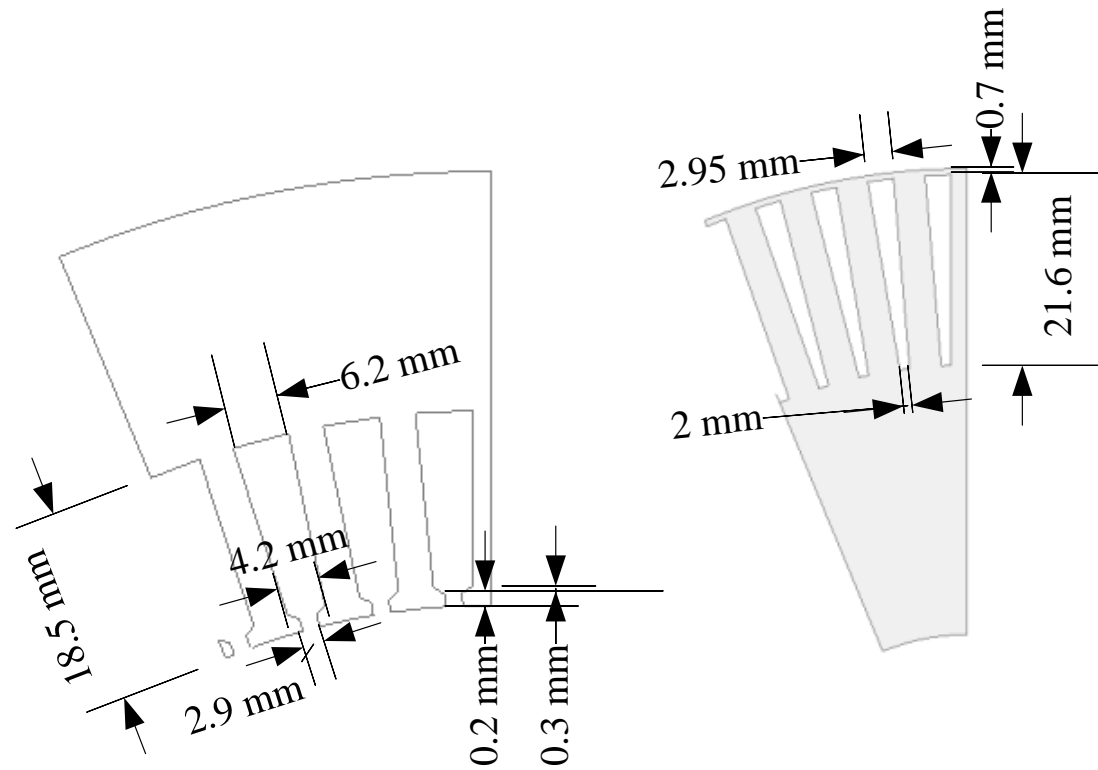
Axial view of the stator and rotor with slot dimensions as used in the analysis [10].
